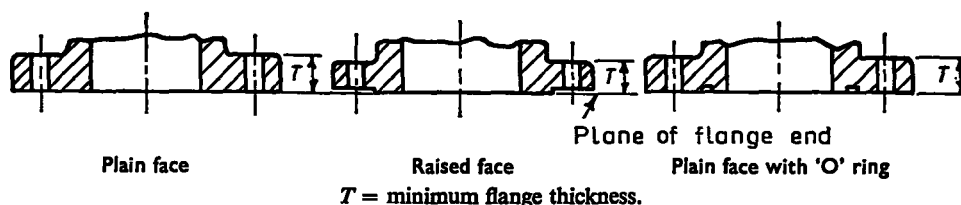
FLANGE END AND MINIMUM FLANGE THICKNESS
